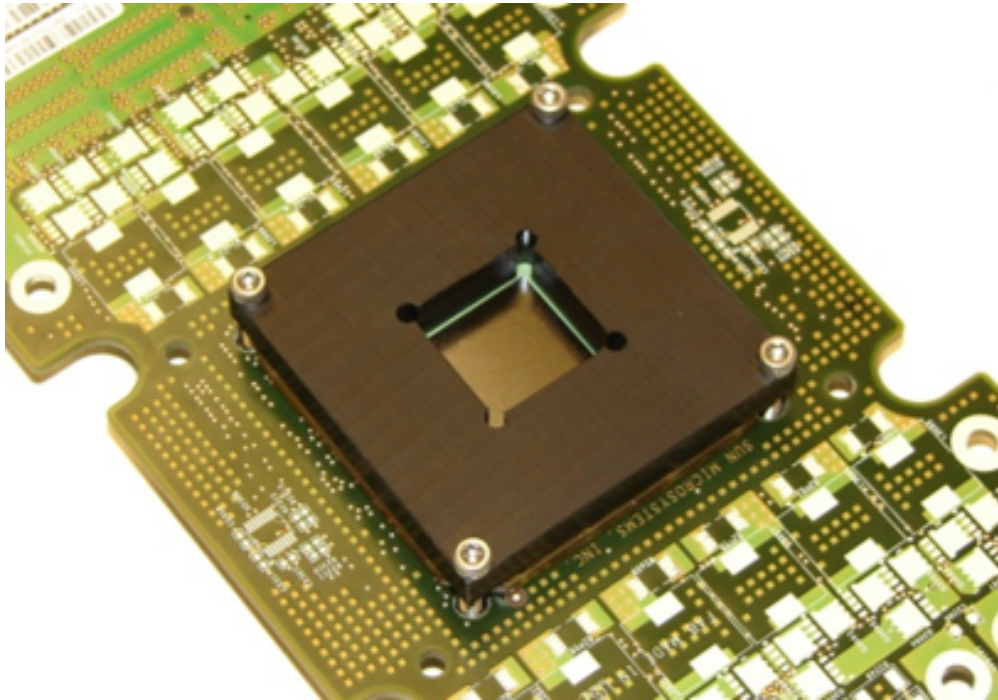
Clamping Fixture for Ceramic LGA (After Solder Reflow and Underfill Steps)
